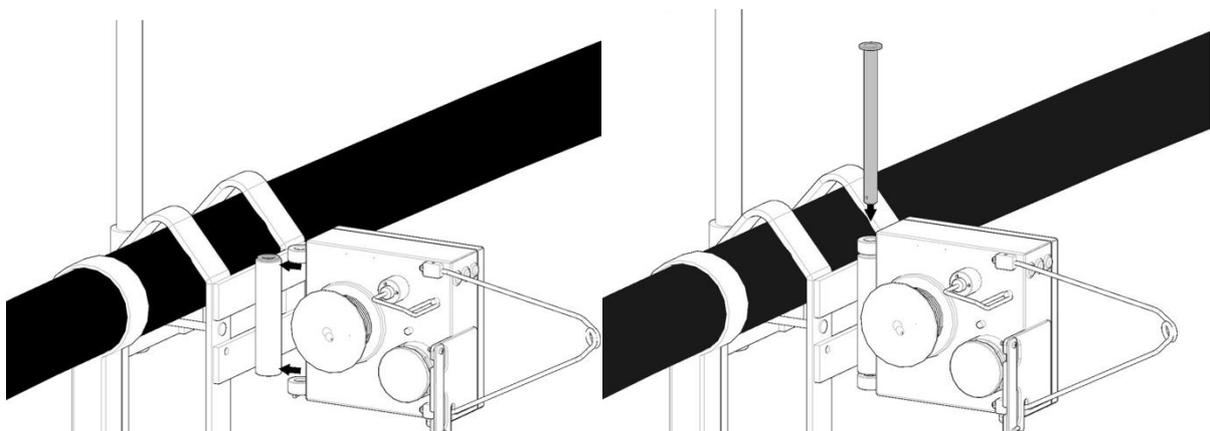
Position the winch on the winch holder on the mounting bracket and secure it in place with a locking bolt
